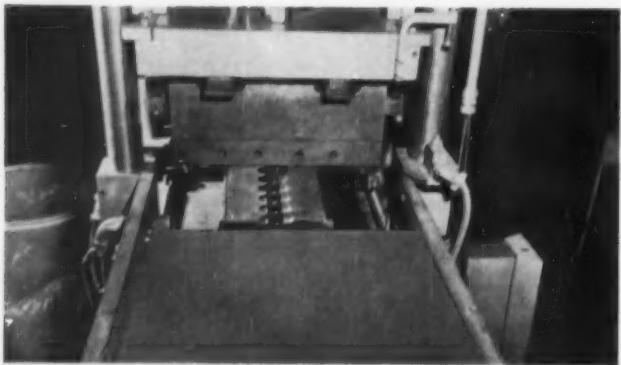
Close-up view of the mold as it begins to open. The two halves are just beginning to draw apart
